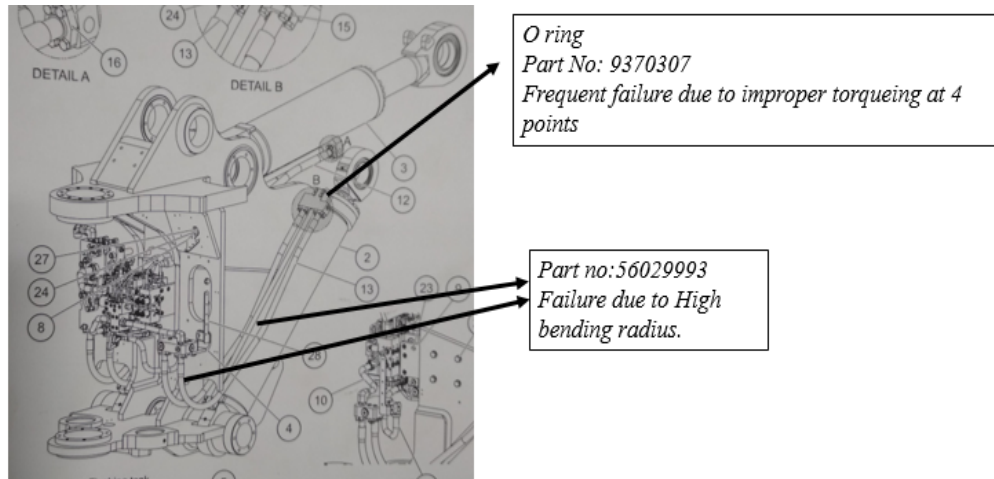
Hydraulic Assembly Hose and O-ring locations and problems
